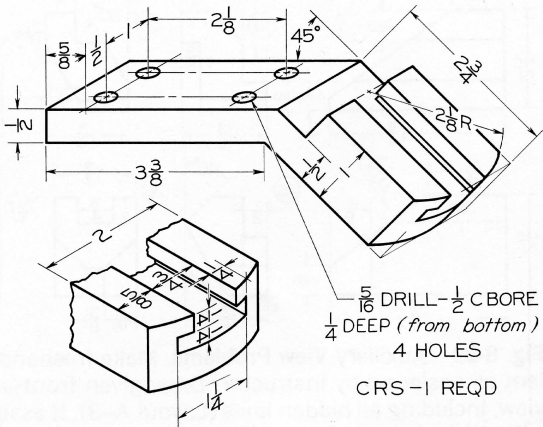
Guide Bracket. Draw necessary views or partial views (Layout B-3).
